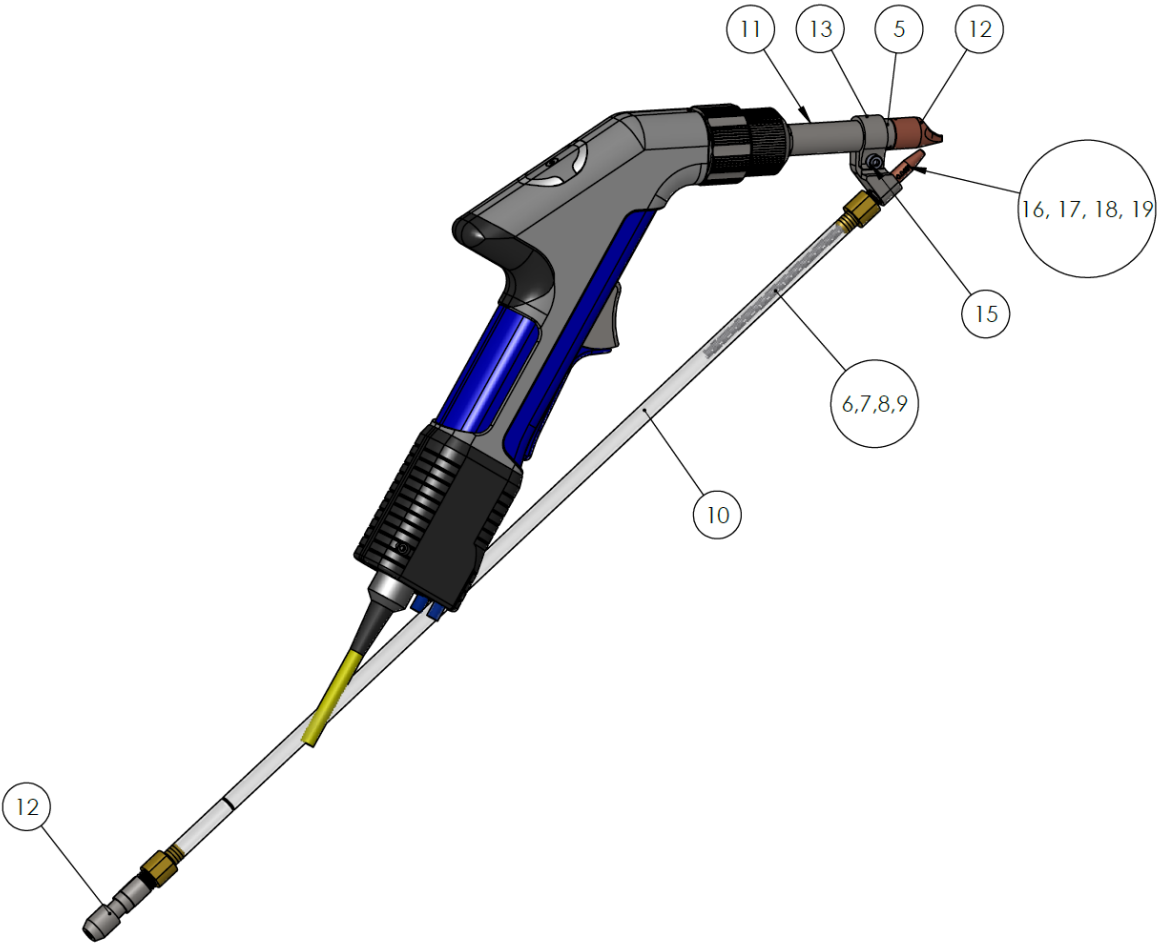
Parts of the Weld Head Assembly, Liner, Extension, Conduit, and Tube
